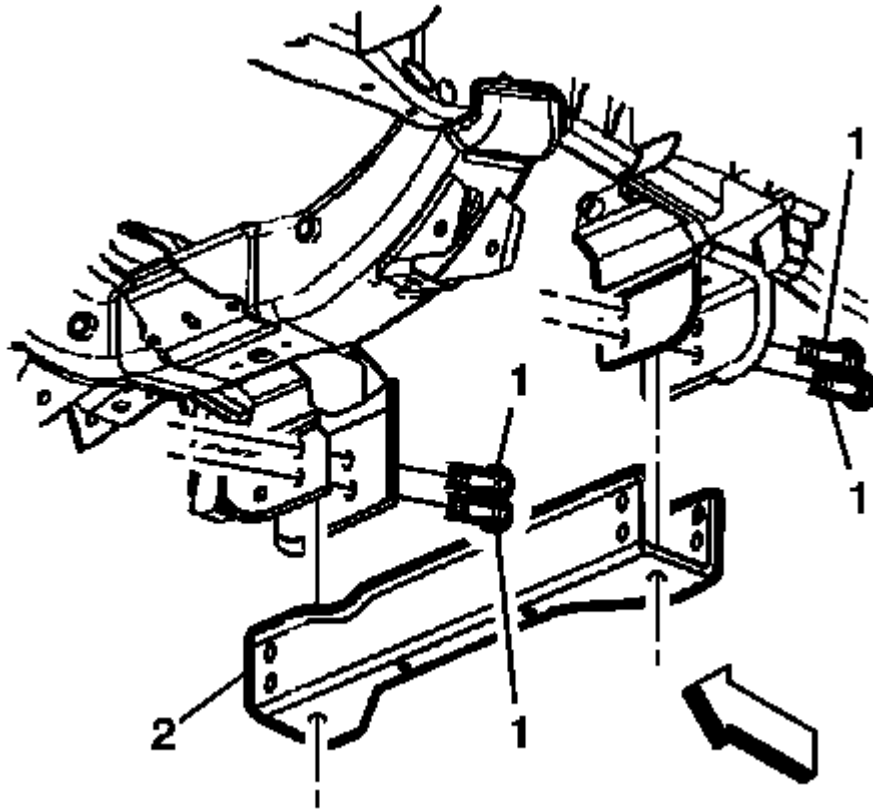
View Of Crossbar Bolts & Bar (2WD)
